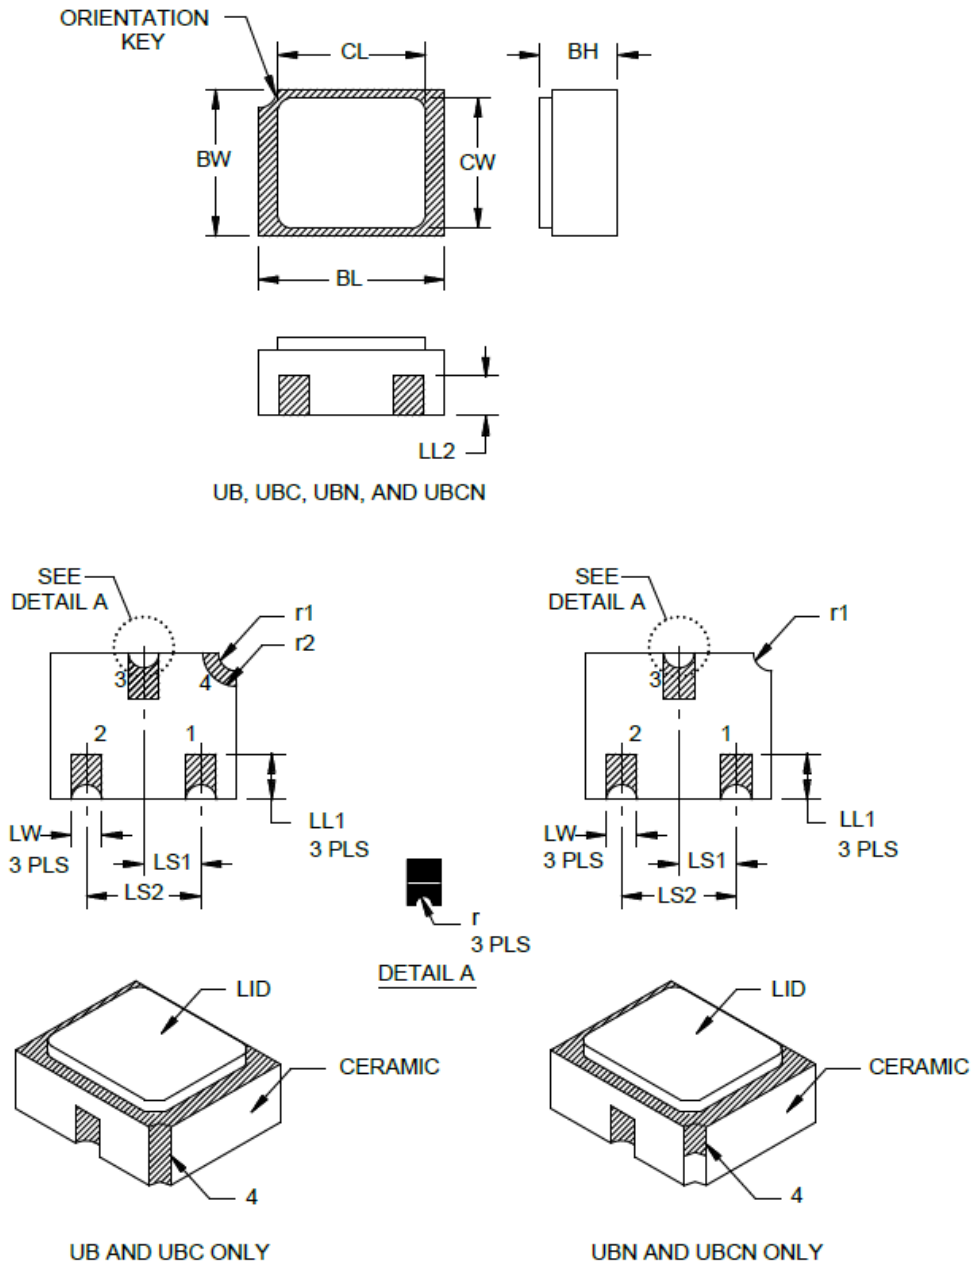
Physical dimensions for 3 and 4 terminal SMD packages (UB, UBN, UBC, and UBCN).
